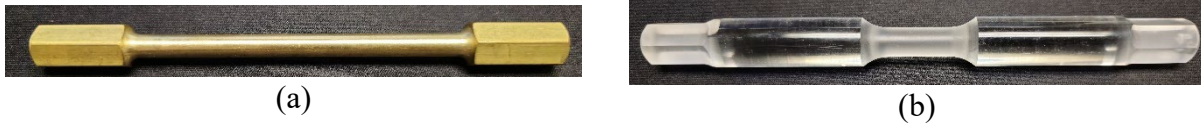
Cylindrical coupon specimen with 3/8 inch 6-point hexed ends: (a) Standard for all metal and printed specimens; (b) modified for polymer and wood specimens.
